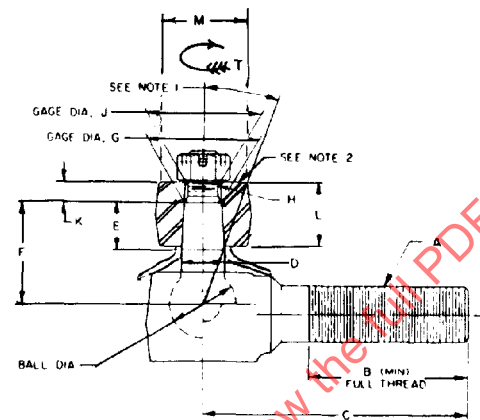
TYPICAL BALL STUD SOCKET ASSEMBLY WITH EXTERNAL THREADED STEM
